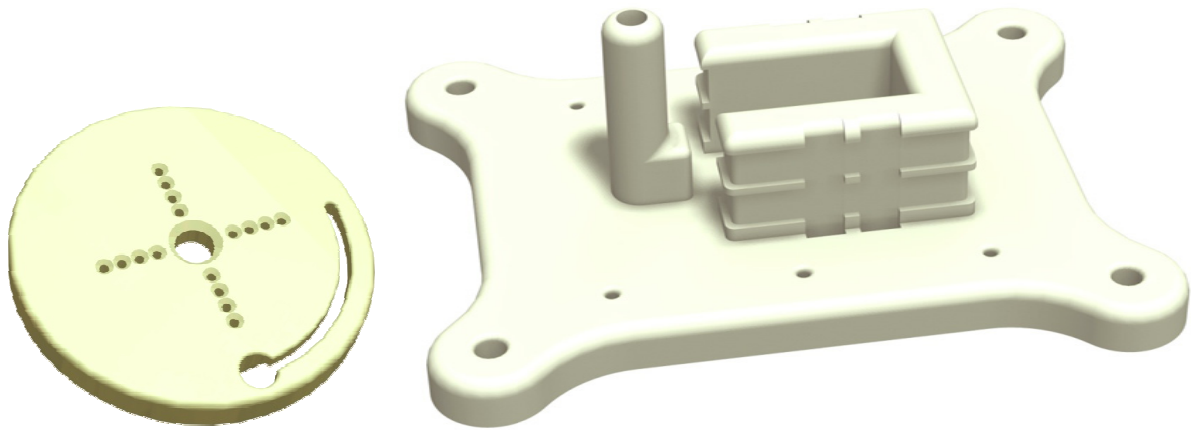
ProEngineer CAD renderings of the 3D-printed components of our transformation mechanism
